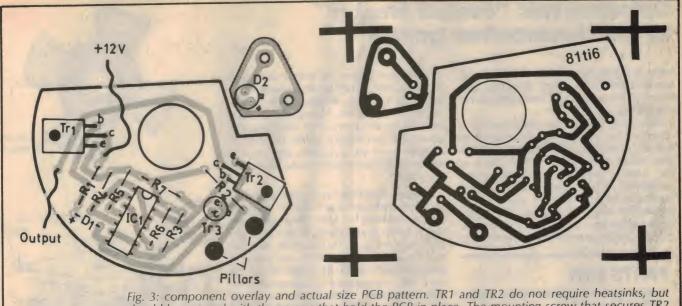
component overlay and actual size PCB pattern. TR1 and TR2 do not require heatsinks, but should be secured with the screws that hold the PCB in place. The mounting screw that secures TR2 also provides the chassis return for the earth track on the PCB.
